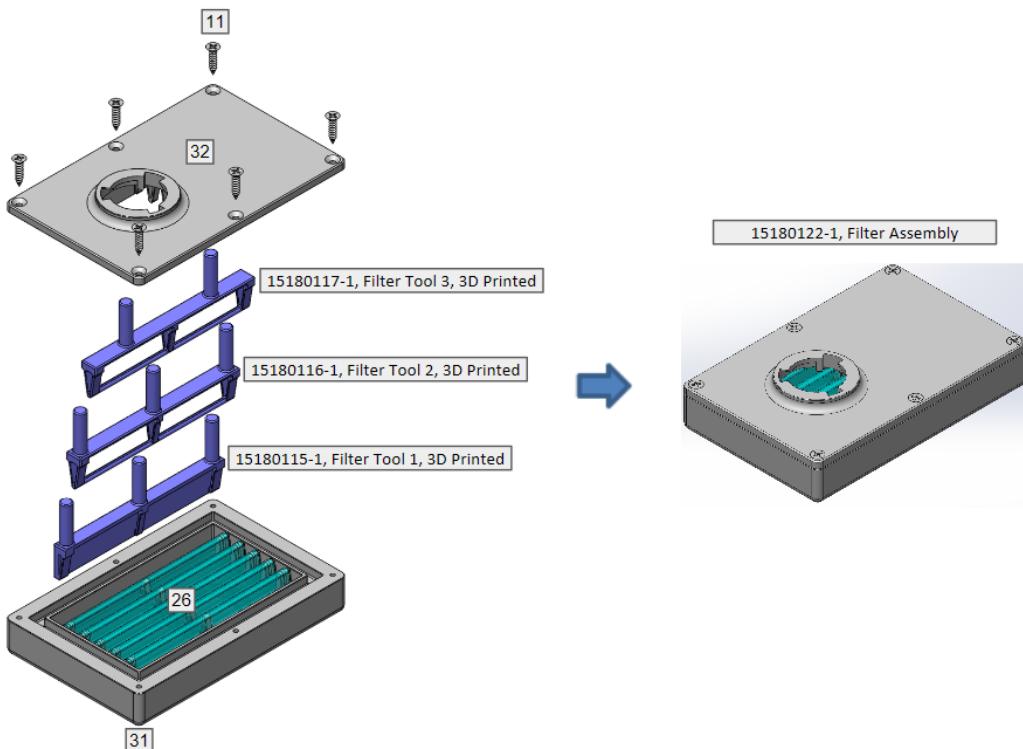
Filter Assembly (10580122-1). 15180119-2 Seal, Rectangular, Filter Adapter (30) is not seen in this image but can be seen in the assembly steps below
